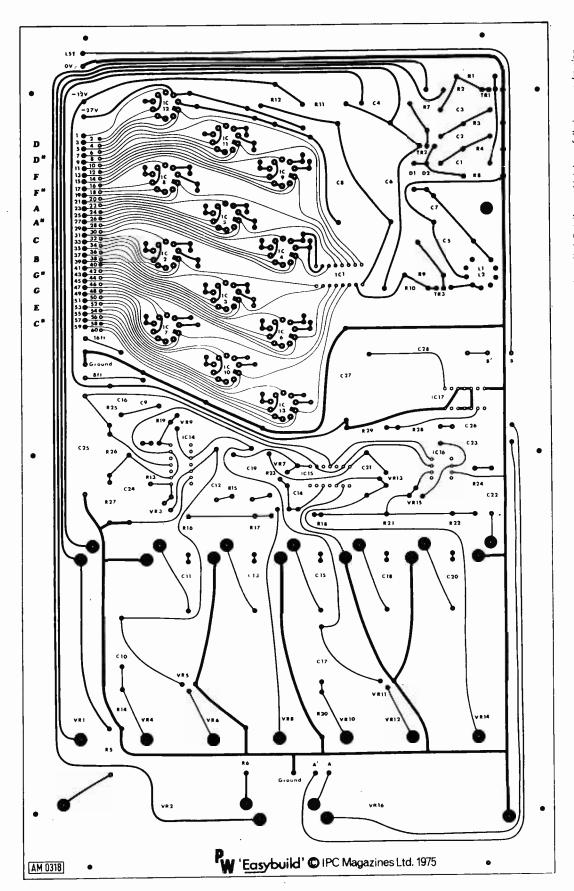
Above, shows the main PCB layout, for reference purposes only. This is NOT ACTUAL SIZE. The board size is 330 x 205 mm (13 x 8in.) Details on obtaining a full-size paper drawing of the Poard is of the board, which will assist constructors to locate the components. The copper side of the board is underneath.
